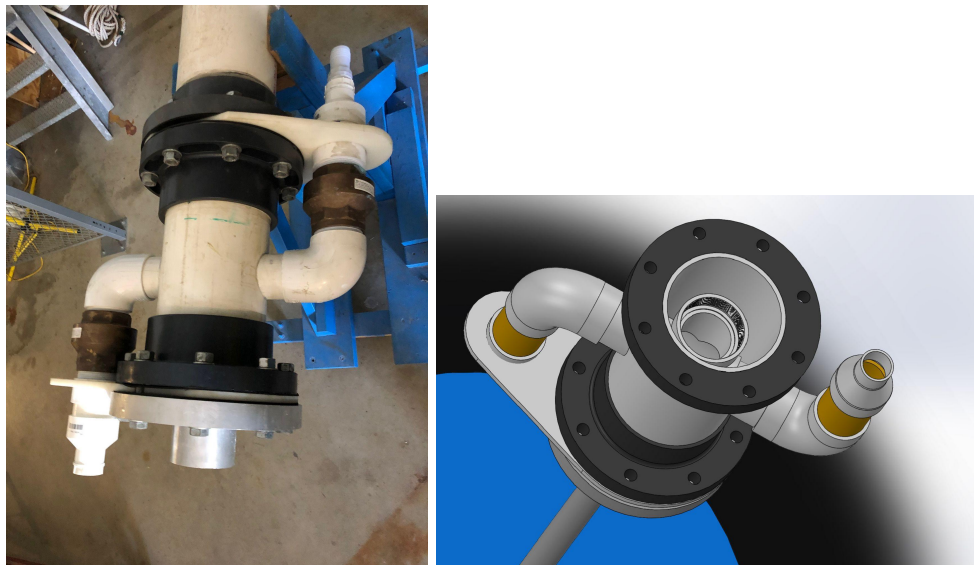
(left): The tee housing bolted to the bottom of the spar.
